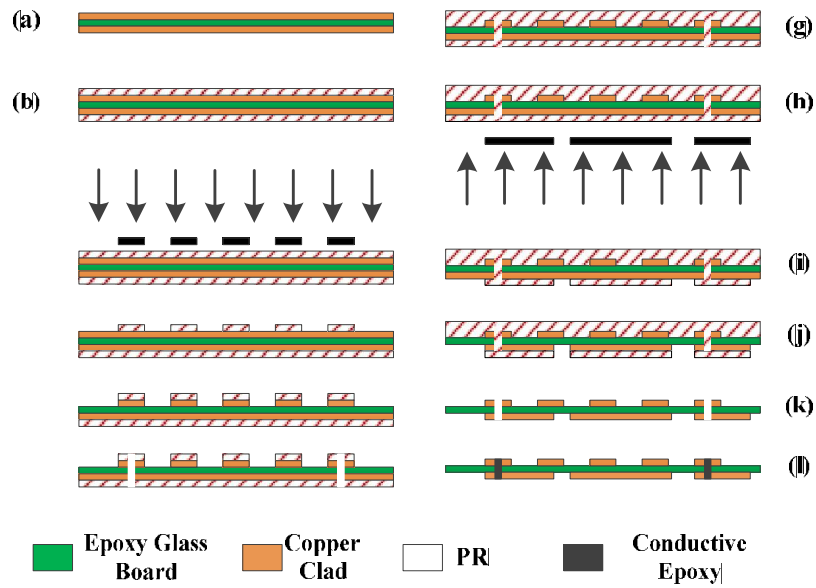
Fabrication steps for patterning the coil on a double-sided flexible PCB: (a) double-sided flexible PCB; (b) spin coating of photoresist (PR) on the top and bottom layers of the flexible PCB; (c) exposure of the top layer of the flexible PCB; (d) developing PR; (e) patterning the flexible PCB copper layer (top); (f) drilling connection through-holes and alignment marks; (g) spin coating a thick protective PR layer on the top layer of the flexible PCB; (h) exposing the bottom layer of the flexible PCB; (i) developing PR; (j) patterning the copper layer of the flexible PCB (bottom) ; (k) stripping the PR; (l) filling the connection holes with conductive epoxy.
